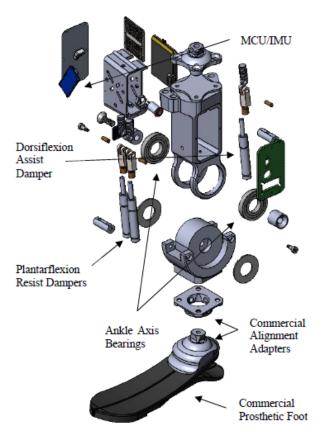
EXPLODED VIEW OF THE ANKLE UNIT WITH COMMERCIAL PROSTHETIC FOOT
